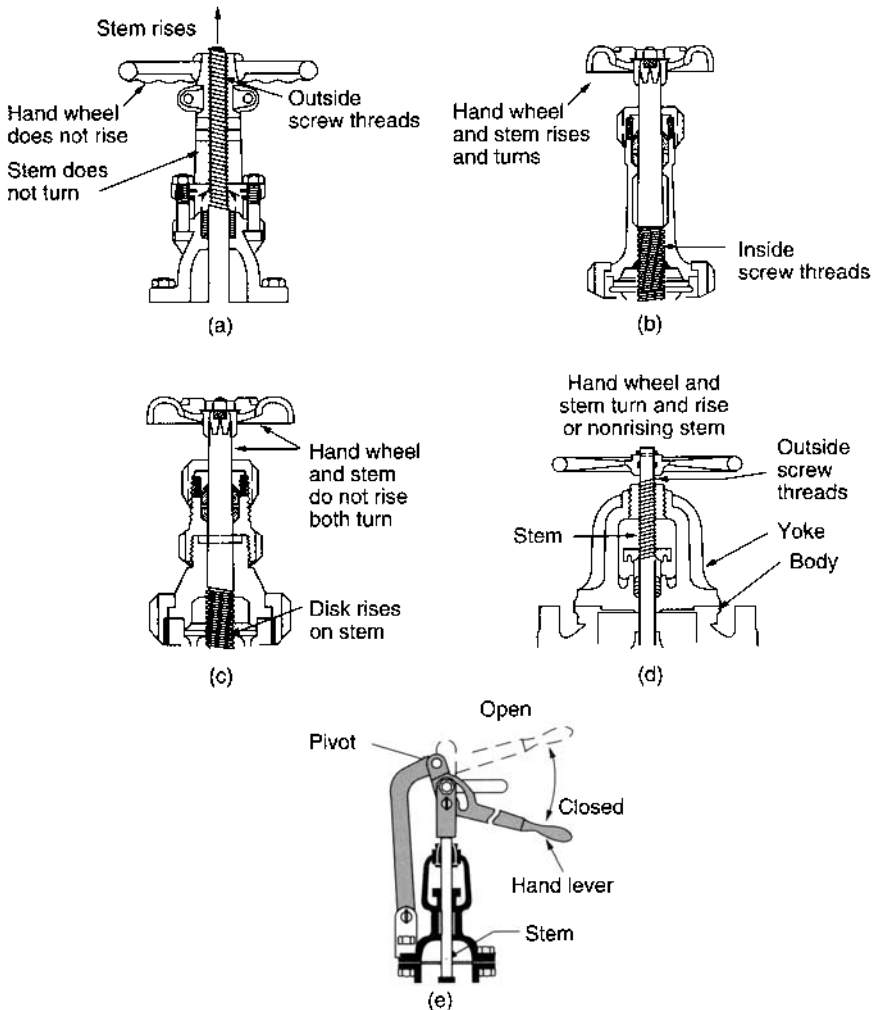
Basic stem construction. (a) Rising stem, outside screw; (b) rising stem, inside screw; (c) nonrising stem, inside screw; (d) rising stem, outside screw and yoke; (e) sliding stem.
